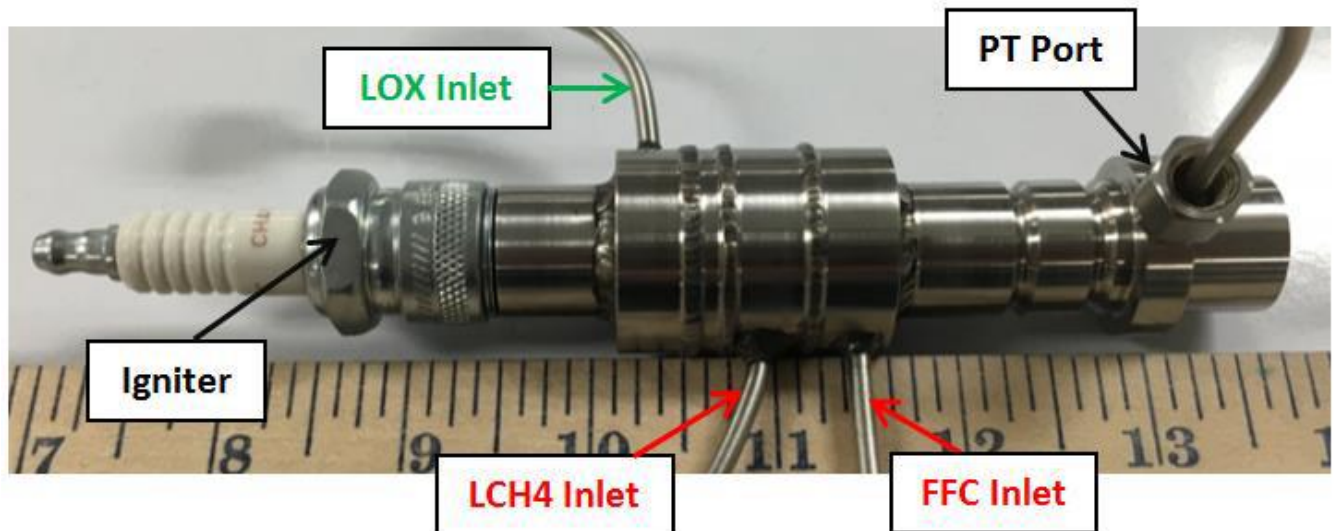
Fully Assembled and Welded Pencil Thruster
